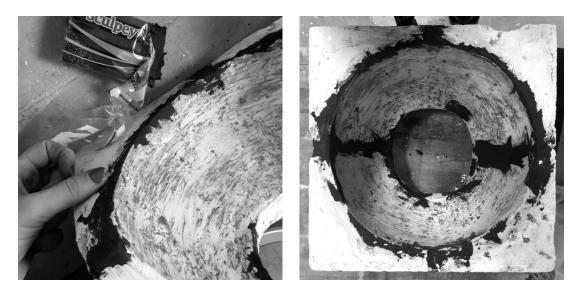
Filling in the Cracks, Holes, and Gaps in My Mold
